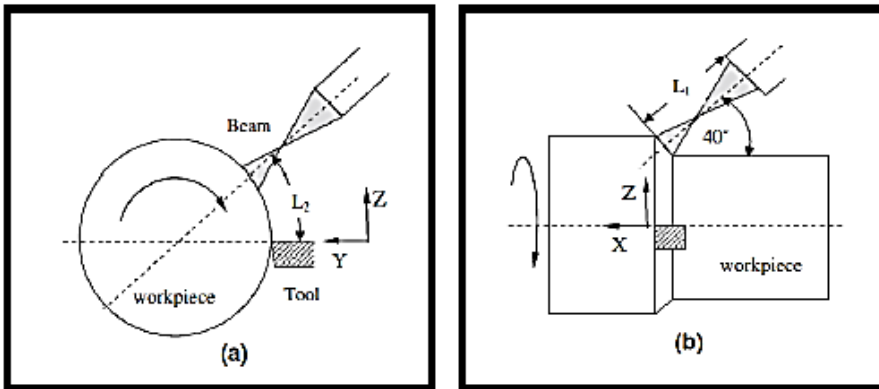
Relative position of laser beam, workpiece and cutting tool in LAT: (a) end view and (b) side view [32].
